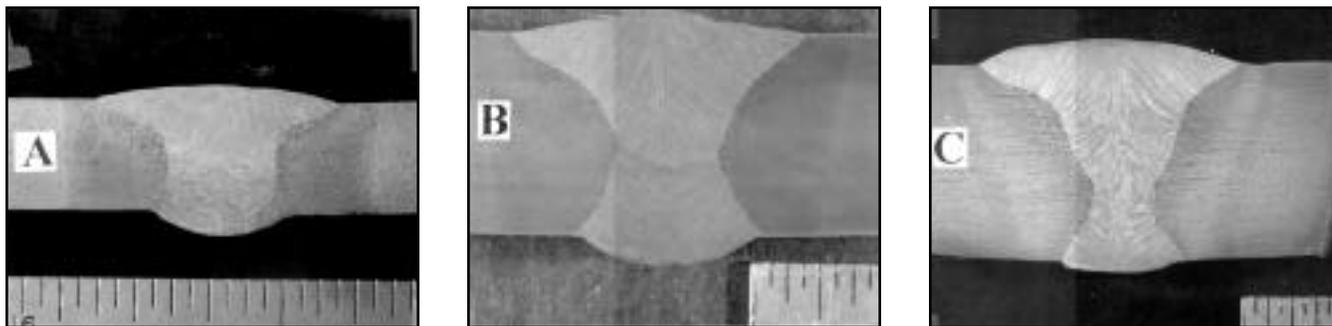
Welds completed by one-pass, two-electrode, one-sided MRF welding in plates of various thicknesses (T) assembled with large root openings (RO). A — $T = 9.5$ mm and $RO = 4.8$ mm; B — $T = 17.5$ mm and $RO = 6.4$ mm; C — $T = 25.4$ mm and $RO = 6.4$ mm. (Scale: 1 division = $\frac{1}{16}$ in. = 1.6 mm).
